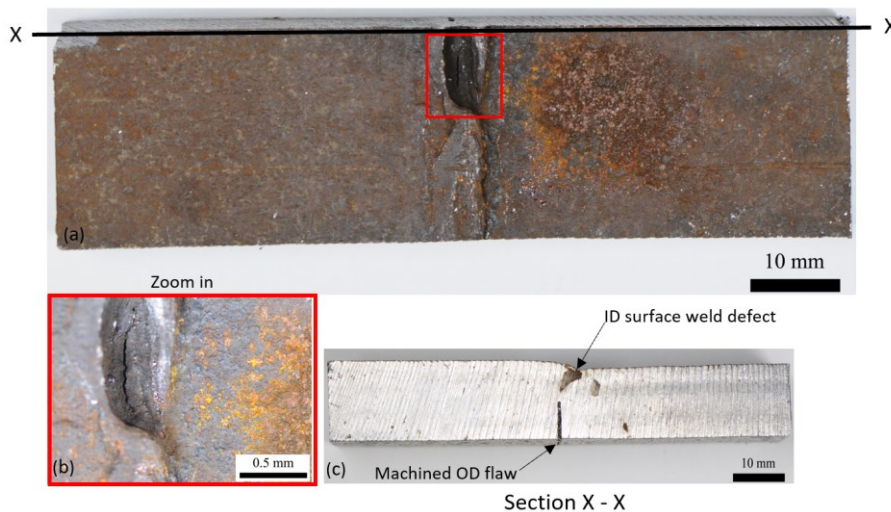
Details of pipe failure through weld defect and section through the wall thickness.
